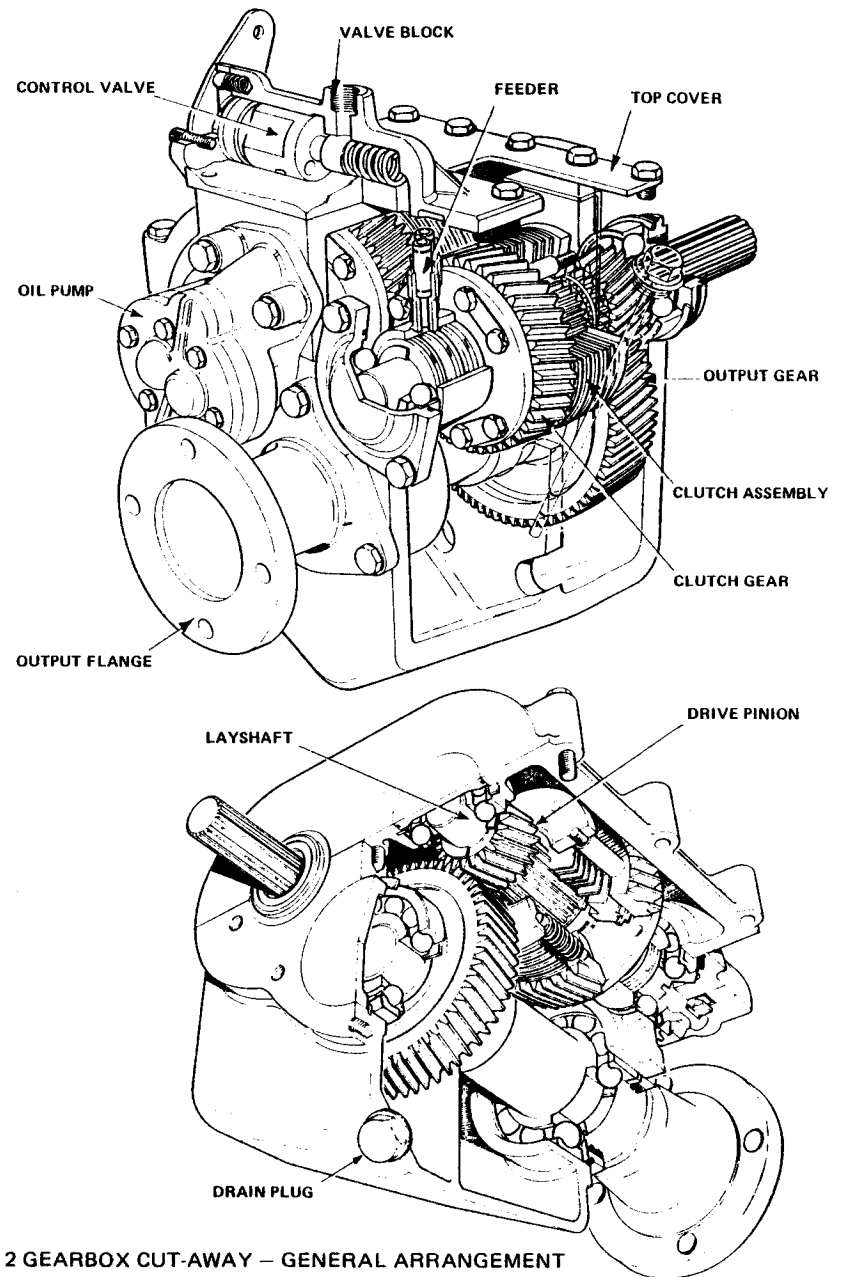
GEARBOX CUT-AWAY - GENERAL ARRANGEMENT
